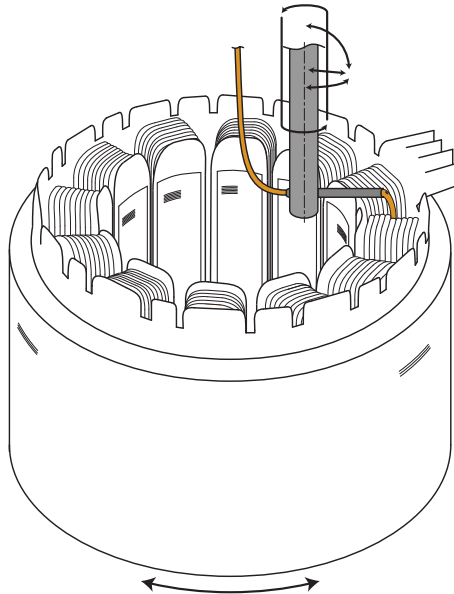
A needle winding process, the winding nozzle can have 1-3 degrees of freedom and the workpiece has 0-1 degrees of freedom. Depending on the workpiece size, multiple nozzles can wind the machine simultaneously.
